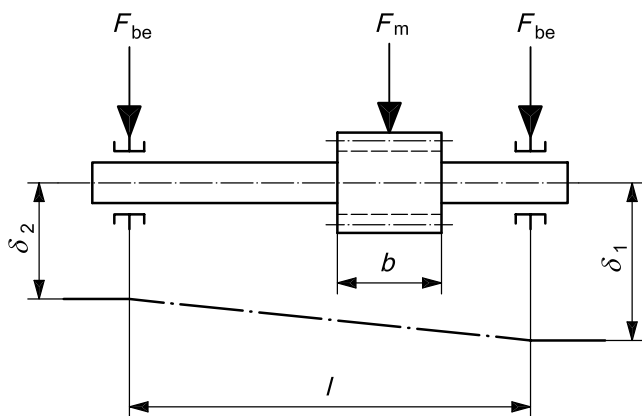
Loading and deflections for gear mounted between the bearings [see Equation (67)]
